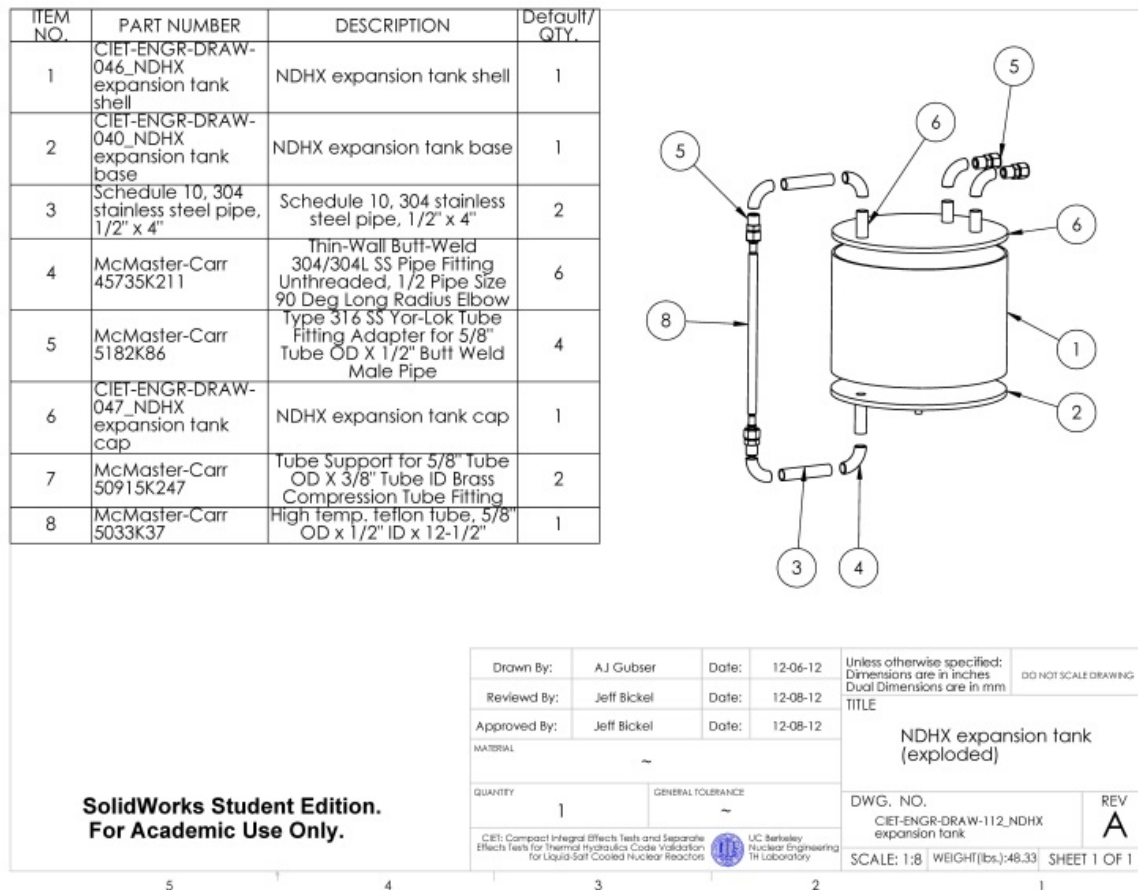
Engineering drawing of the upper fluid expansion tank (DRACS loop).
